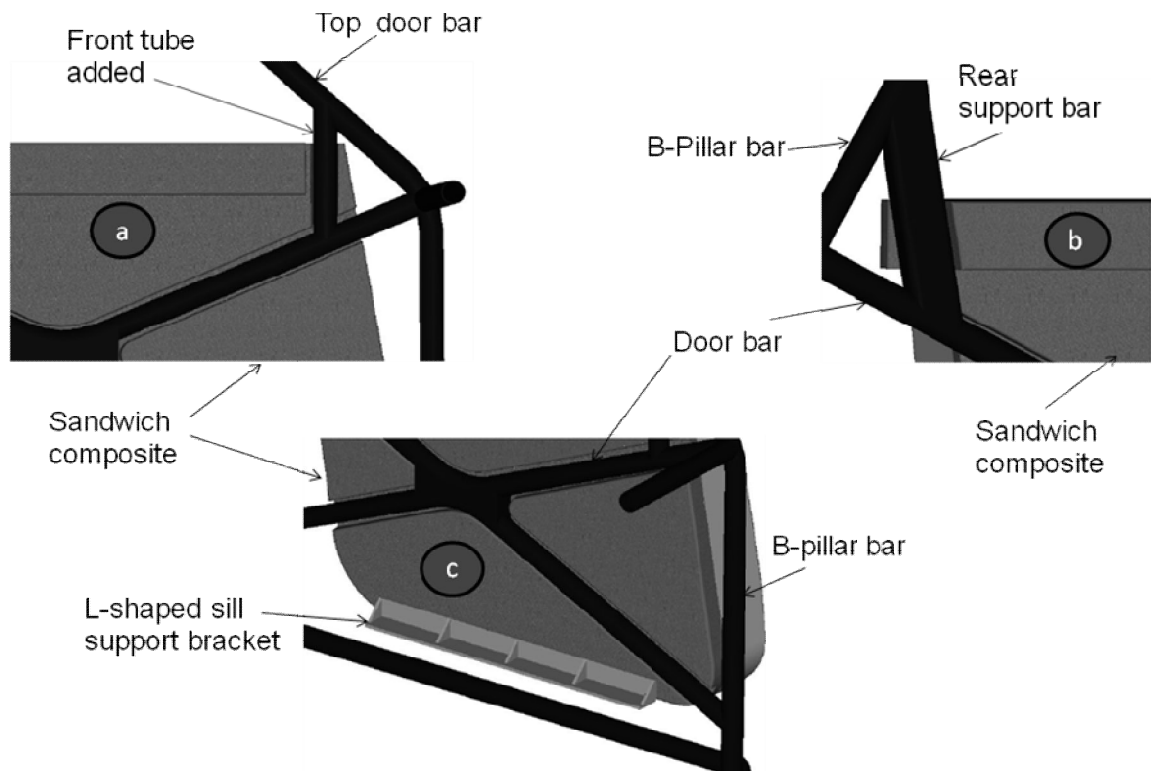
(a) The added front tube between the A-pillar tube and the top Door-bar this tube is welded with its longitudinal axis perpendicular to the floor of the car; (b) weld connection of the rear support bar, welded between the vertical bar behind the B-pillar and the top side-impact bar, right behind the B-pillar. This provides support for the rear of the beam; (c) sill support - the bottom of the plate needs to be supported so that it can react the loads applied to it. An L-shaped support is welded onto the sill to provide the support area. As can be seen in the support is triangulated to provide the appropriate support.
